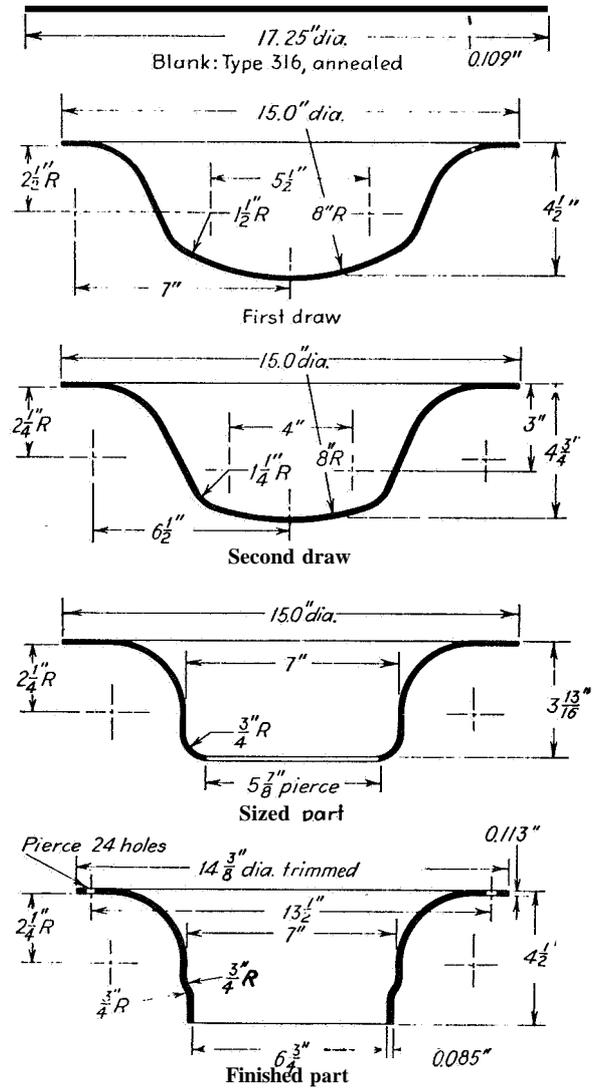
AN EXAMPLE OF A DRAW USING A HIGH BLANKHOLDING PRESSURE (Ref. 79)
